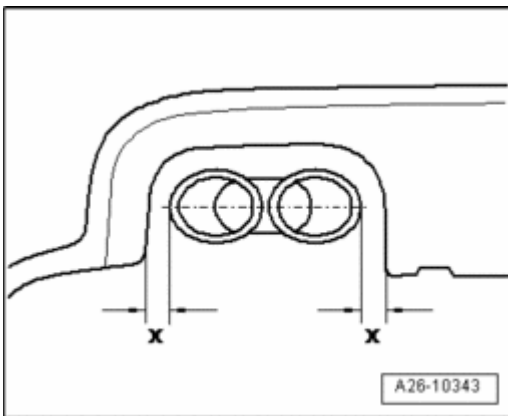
Checking Distance Of End Pipes At Left/Right To Bumper Cover
